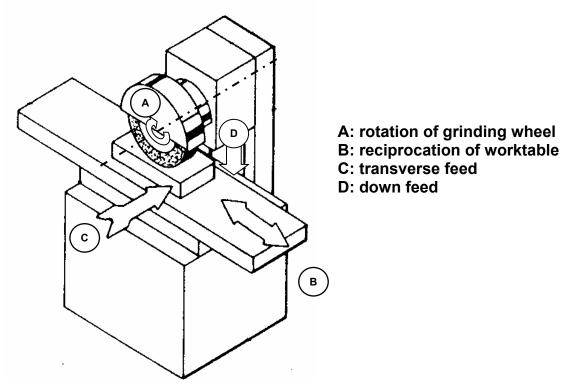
Horizontal spindle reciprocating table surface grinder
